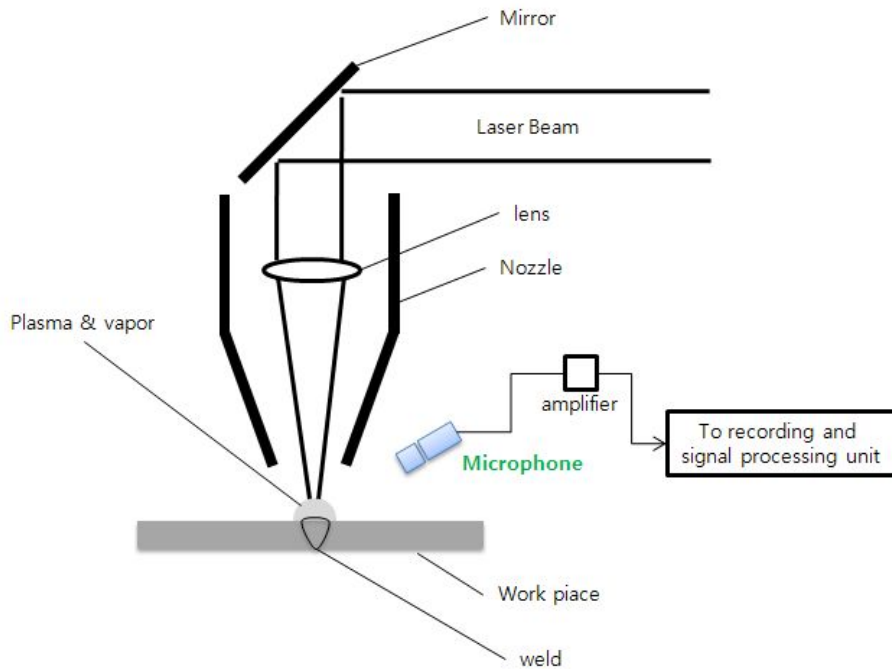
Typical setups for weld monitoring using audible sound
